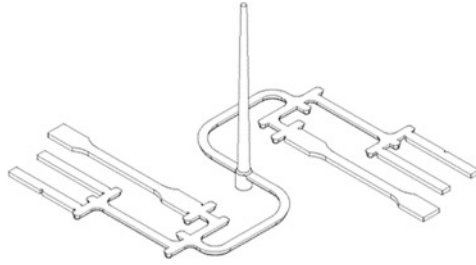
Test specimen consisting two tension bars, bending arms and notched bars
